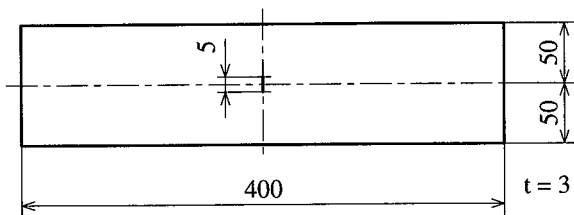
Configuration of CCT specimen. Dimensions are mm.
